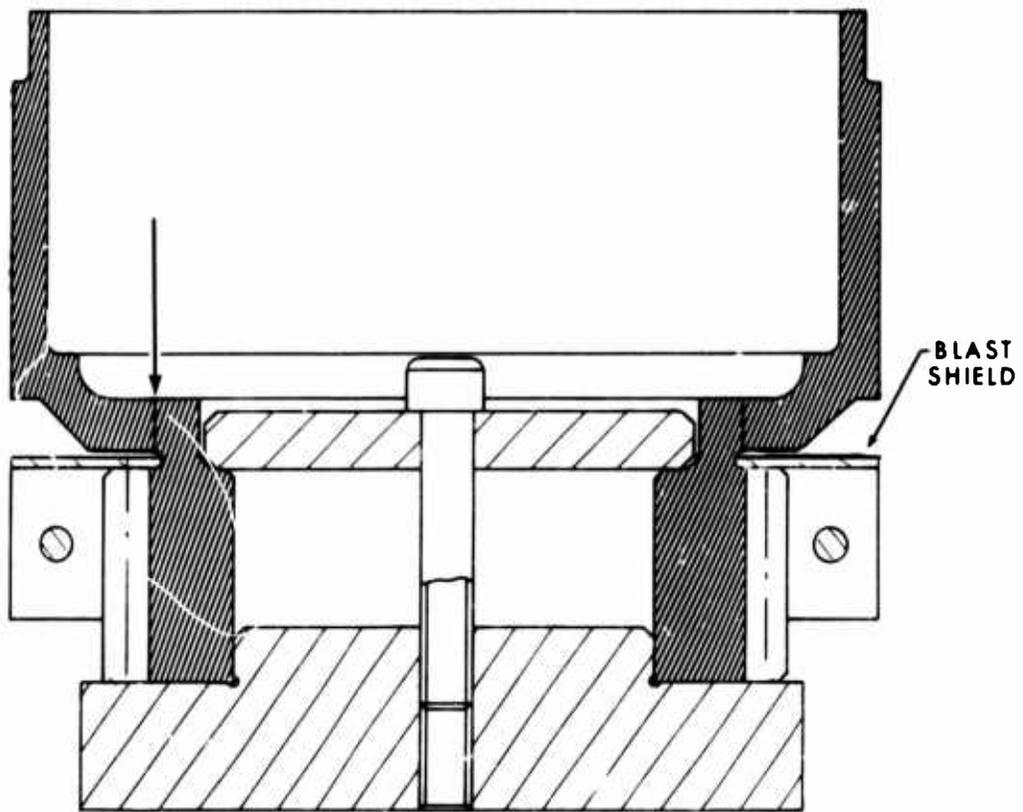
Welding Fixture for Second-Row Pinion Small Gear to Shaft Weld.
